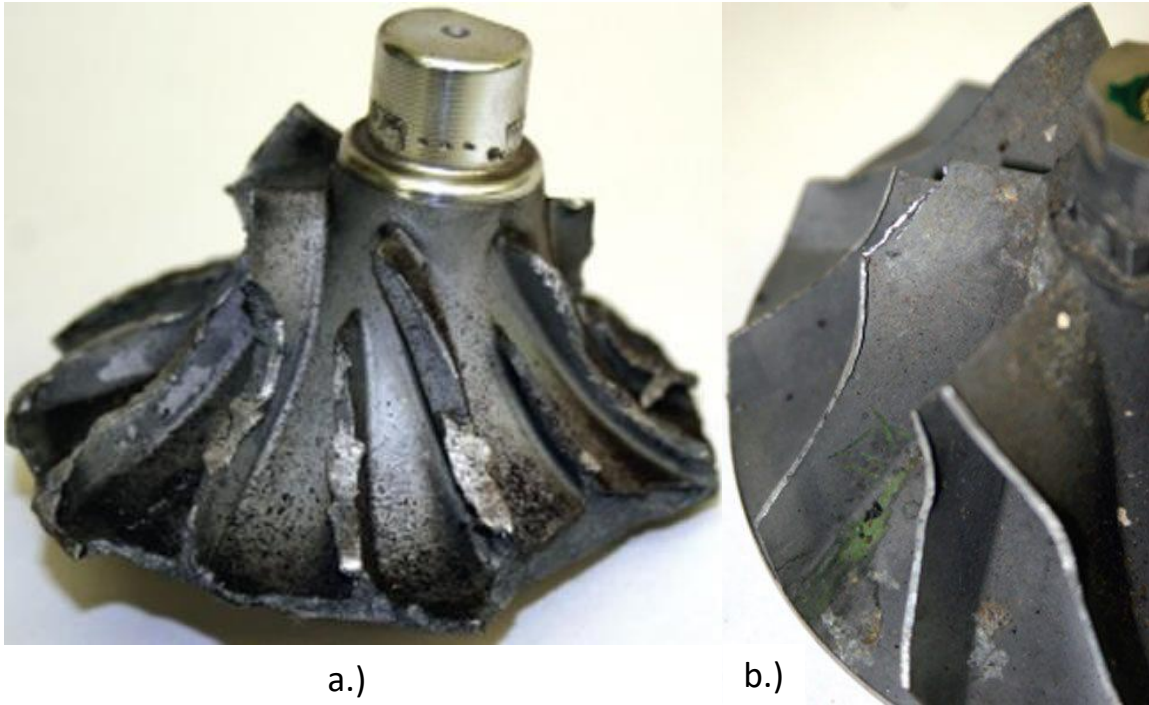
Centrifugal Compressor Failure. a.) Wheel and Blade Failure. b.) Blade Tip Failure [25]
